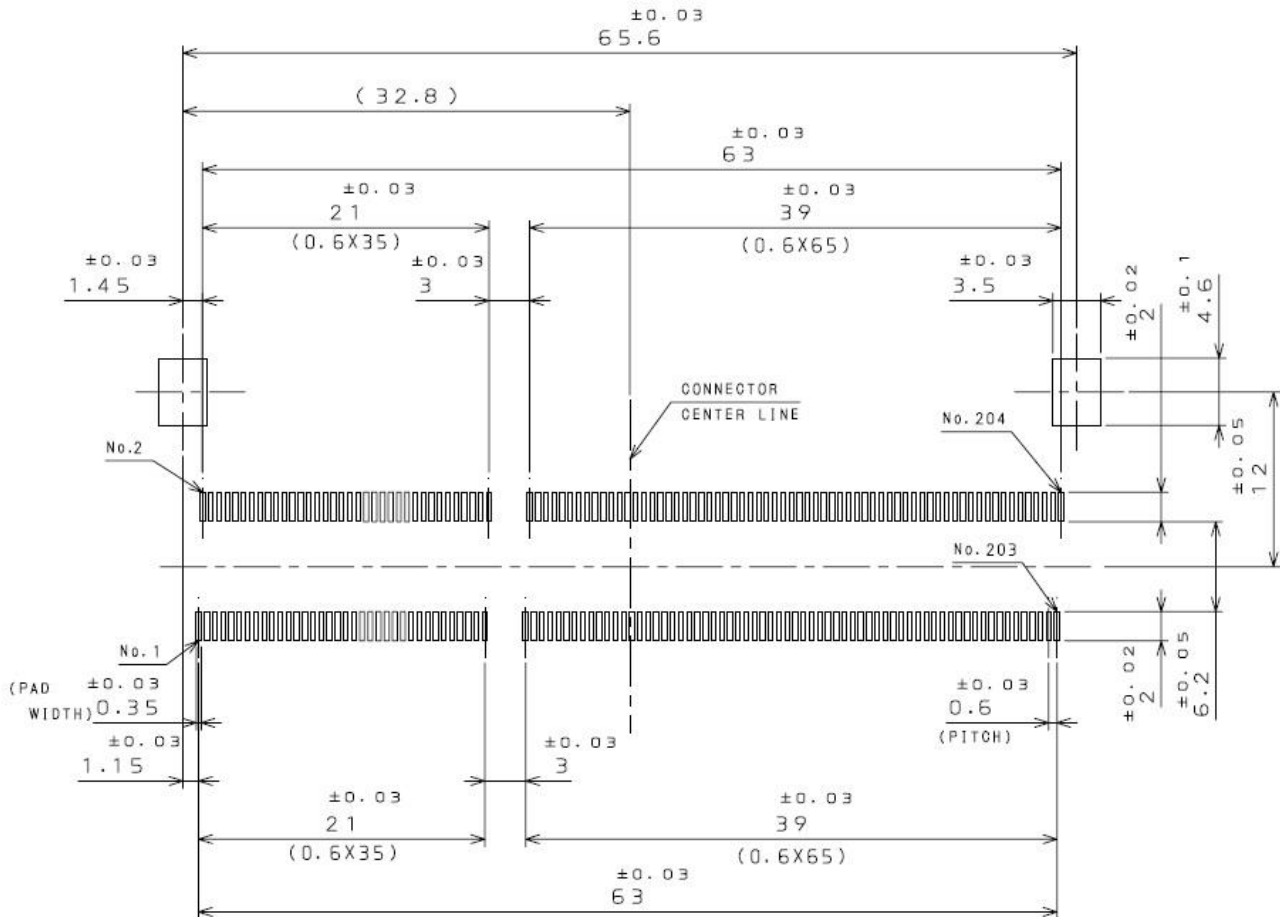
MM80-204B1-E1 Recommended PCB Footprint
